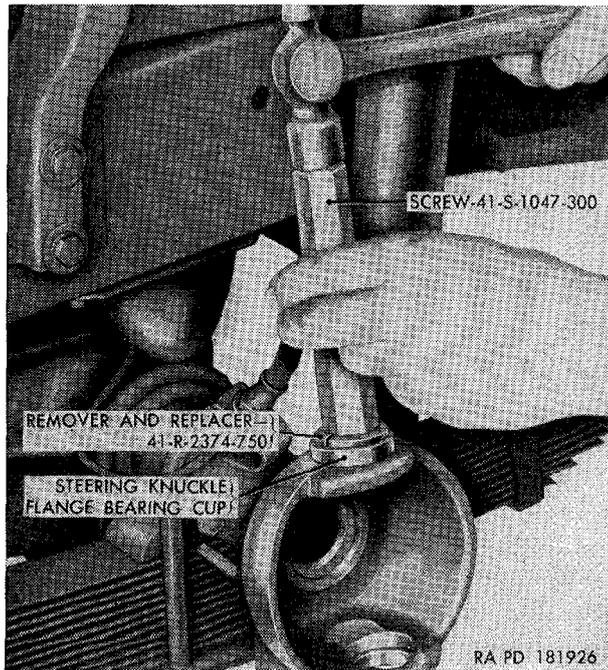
Installing steering knuckle flange bearing cup into front axle housing, using remover and replacer 41-R-2374-750 and screw 41-S-1047-300.
